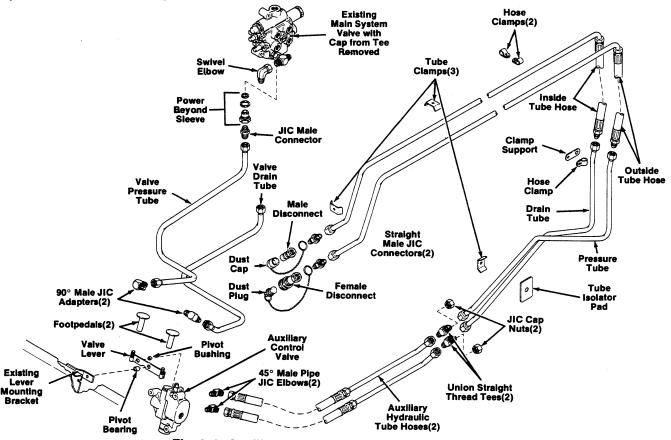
Auxiliary Front Hydraulics Mounting Detail
